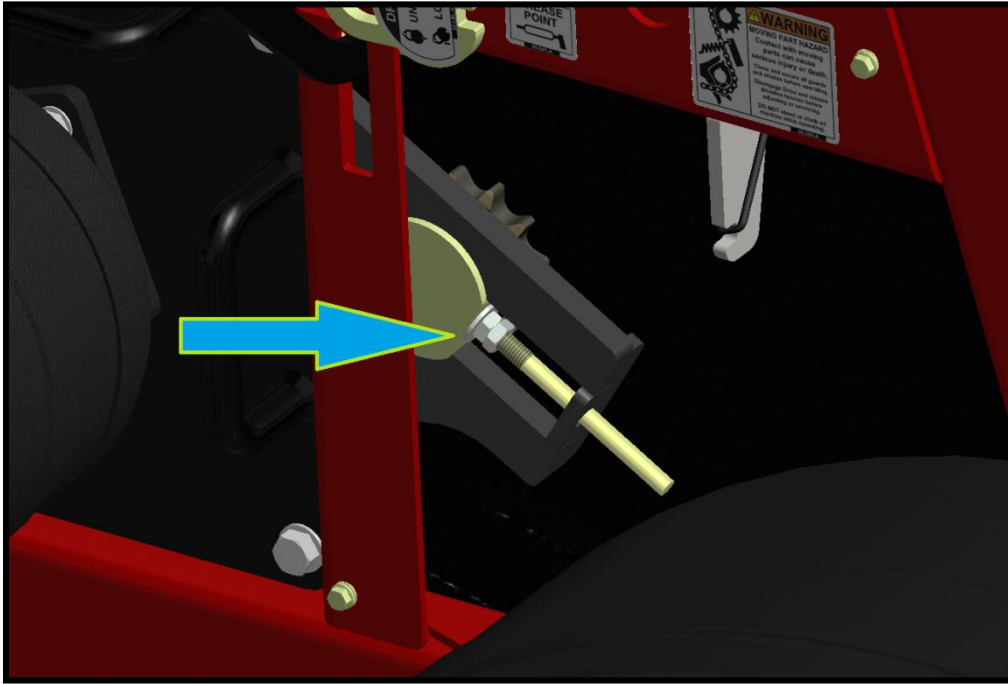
Drive Chain Adjuster (Drive side inside frame)
